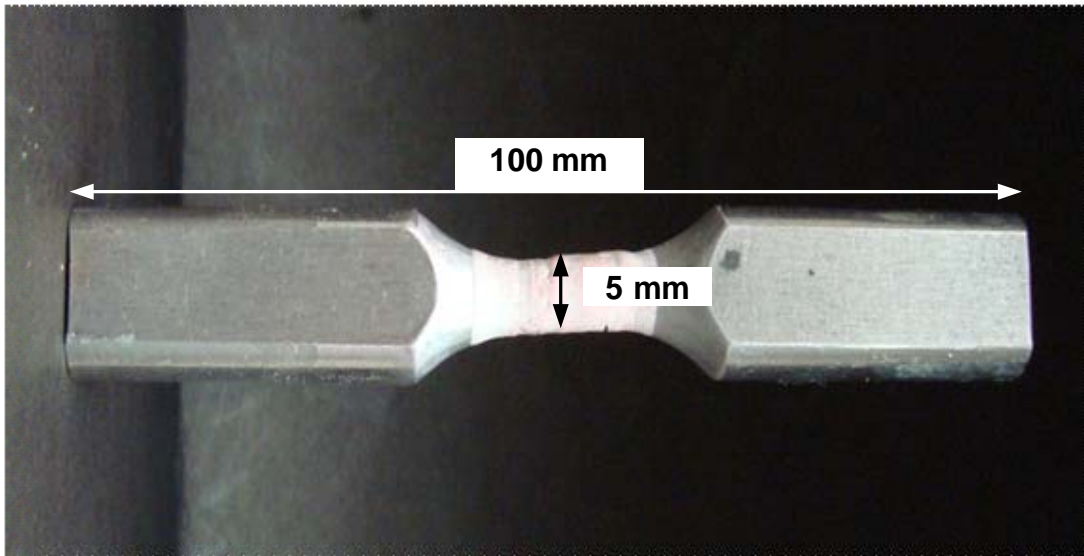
Specimens used for cyclic materials testing (dimensions are in mm)
